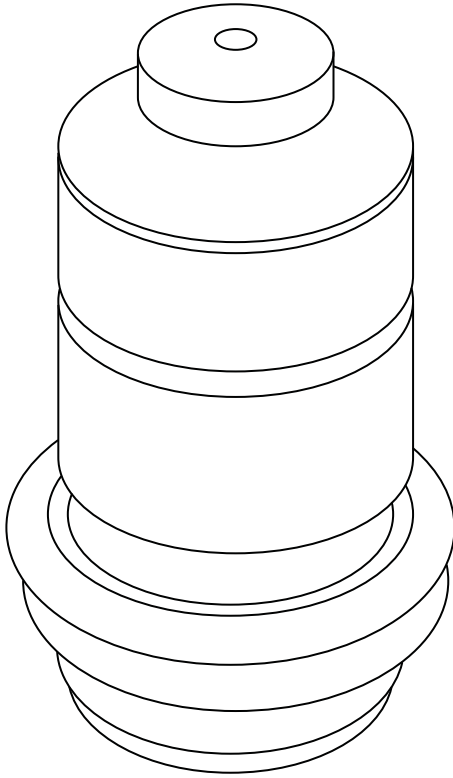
Oil Seal Pressing Tool (332/Y4029)
